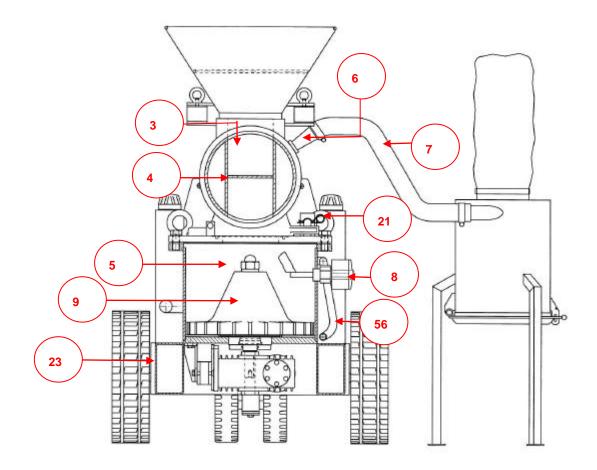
Overview drawing of the TSN / B1N Shotcrete Machine, front view
